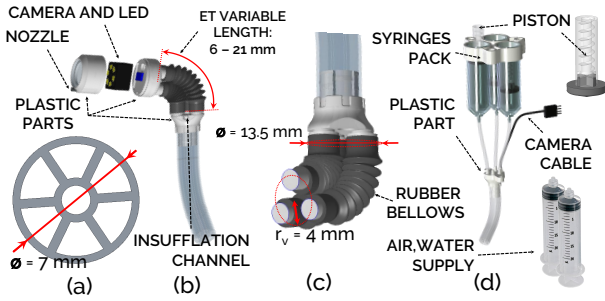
Disposable Parts: (a) Cross section of the multi-lumen catheter; (b) ET exploded view; (c) PBA; (d) Proximal end of the scope, syringe pack.
